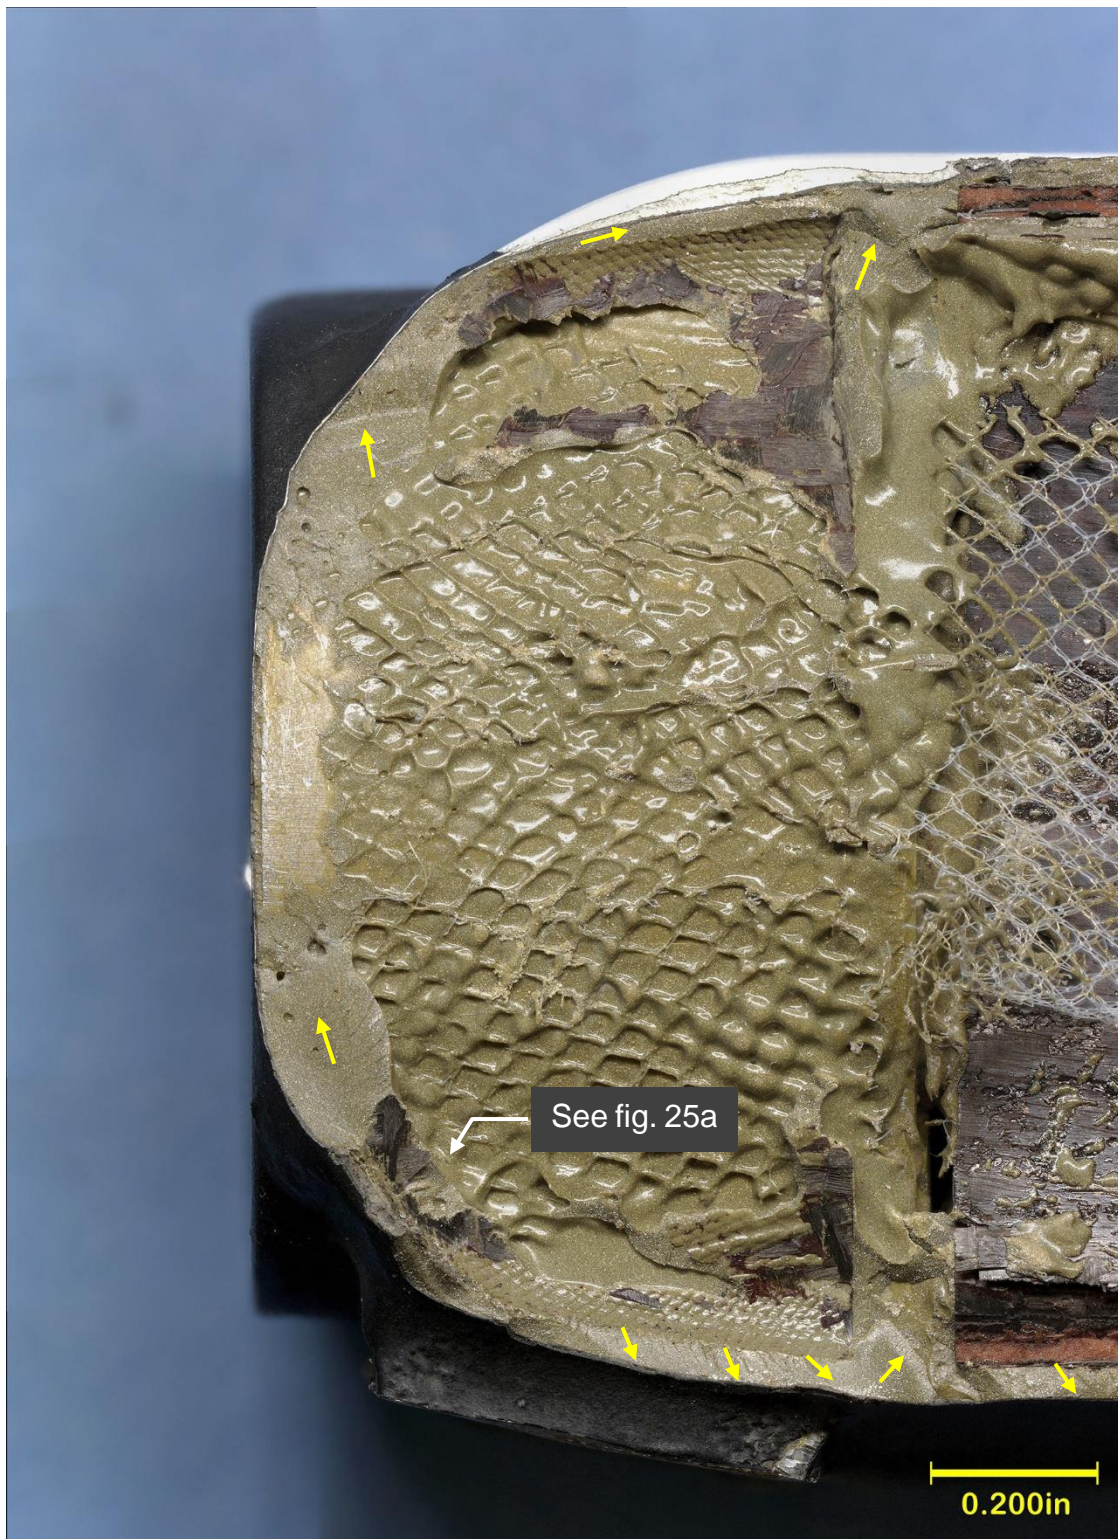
Aft face of the aluminum fitting exhibiting adhesive, scrim cloth, and peel separation of a carbon fiber ply.
